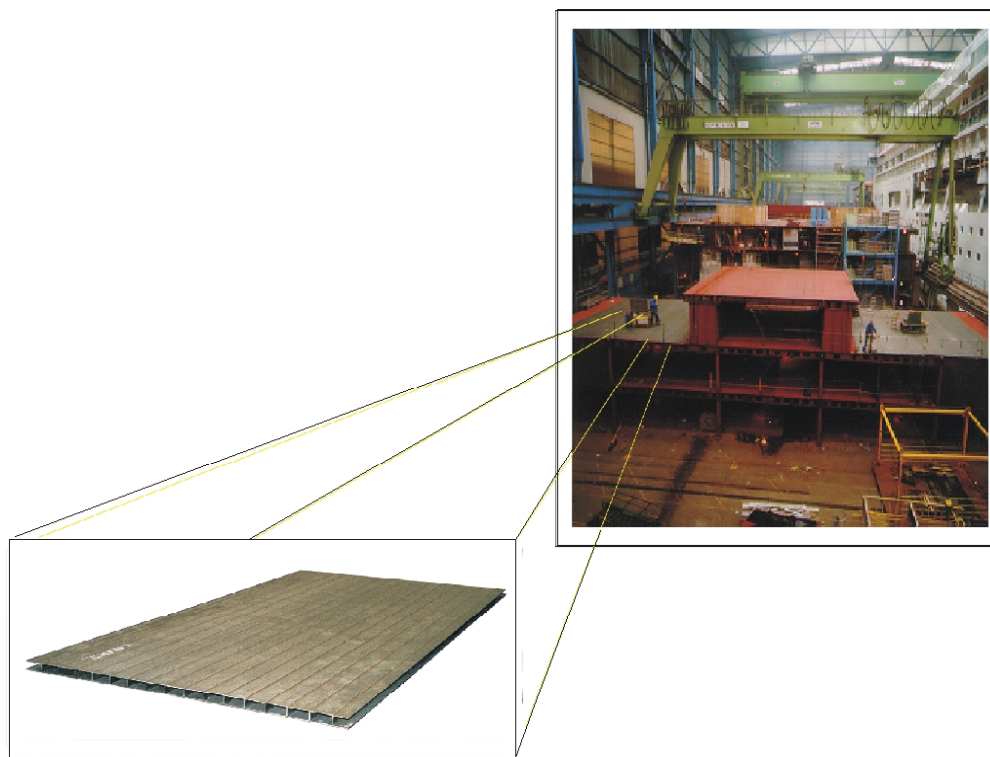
Example of installation of all steel sandwich on a cruising ship deck structure.
